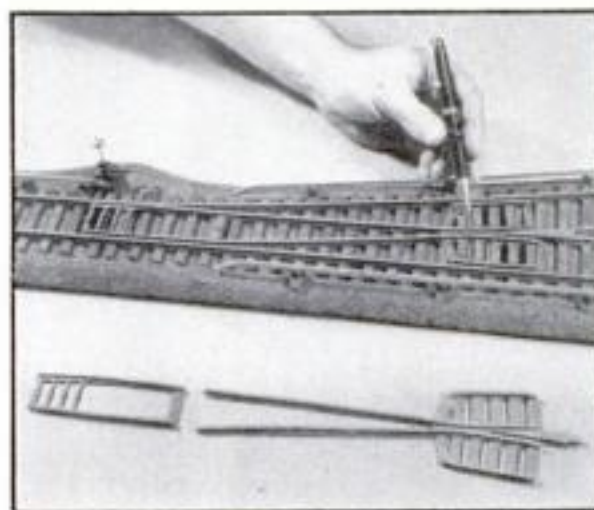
An "O" gage switch assembled from stock parts, and two easily fitted castings
